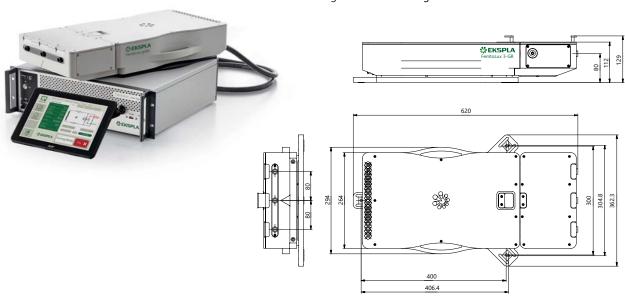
Outline drawings of FemtoLux 3 laser head with second harmonic option
